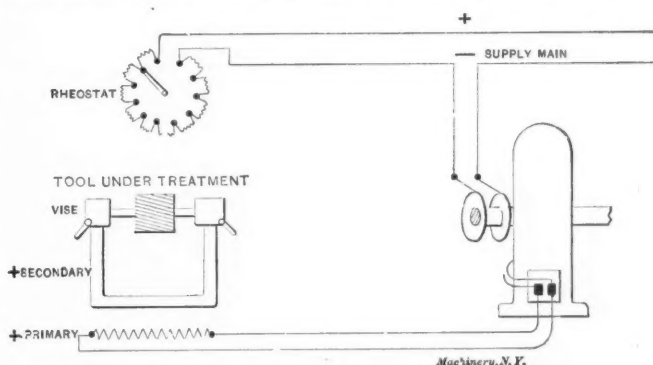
Apparatus for Tempering Milling Cutters Electrically.
